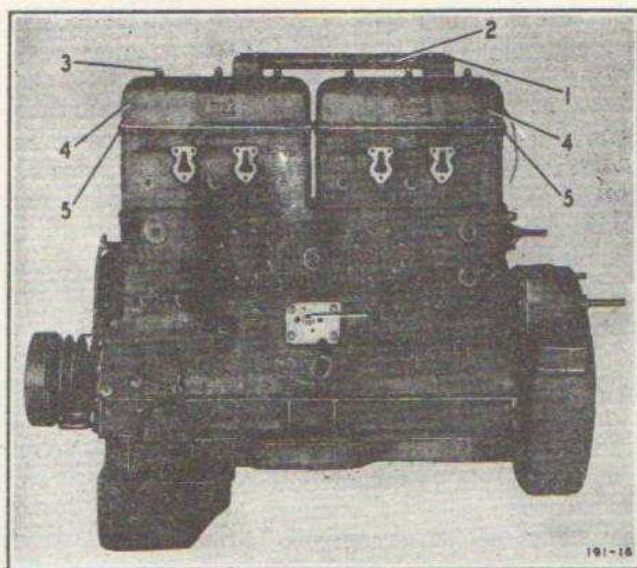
View Indicating Parts To Be Removed to Expose Valve Mechanism—also Oil Line Bushing (6)
